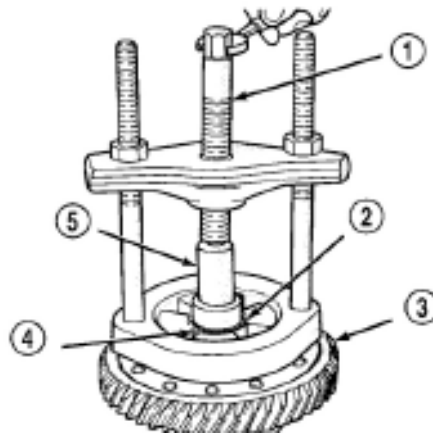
Disassembly of differential bearing taper sleeve via ring gear
